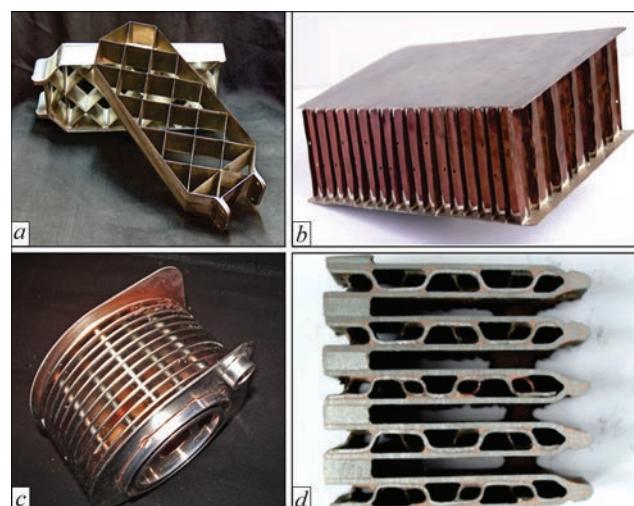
Brazed thin-walled stainless steel structures: rocket rudders (a); plate heat exchanger (b); automotive oil cooler: exterior (c) and vertical section (d)
